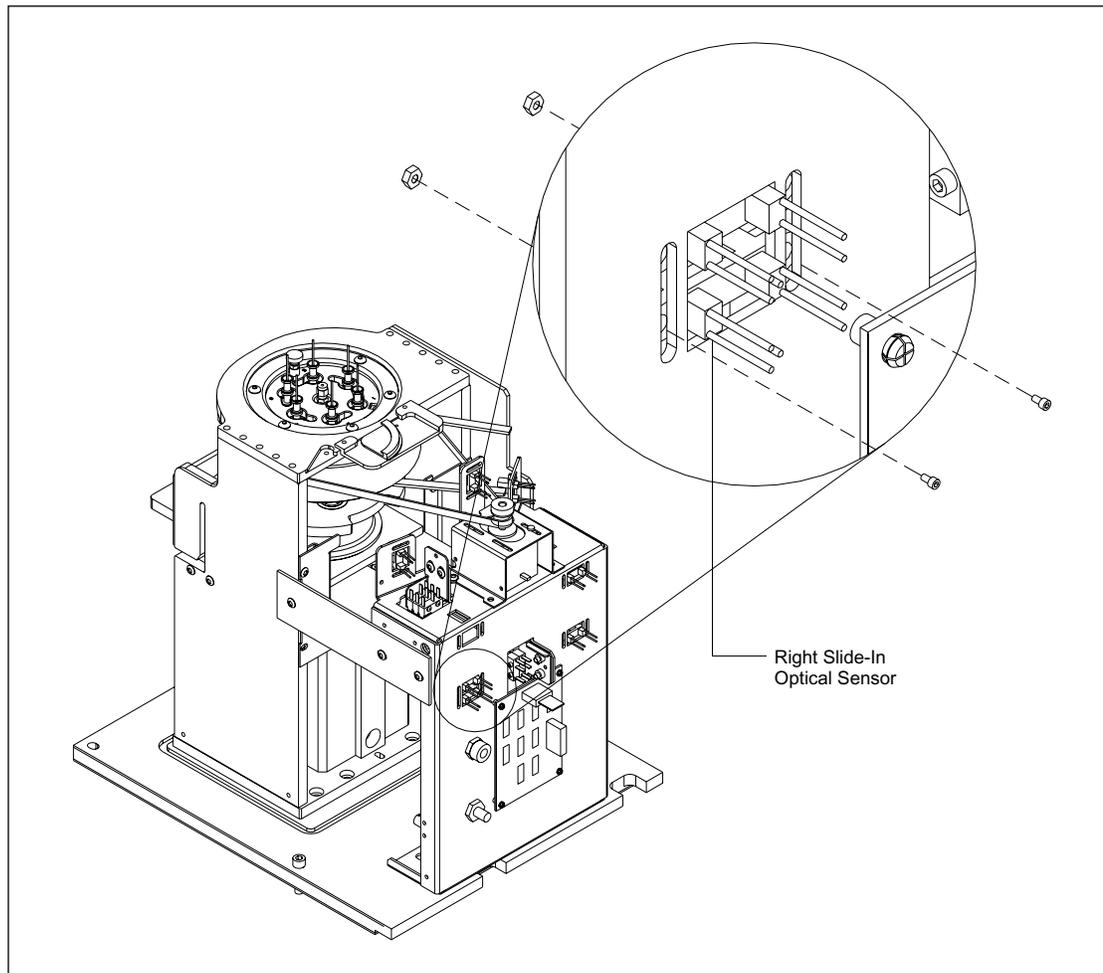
Anode Right Slide-In Optical Sensor Mounting.
